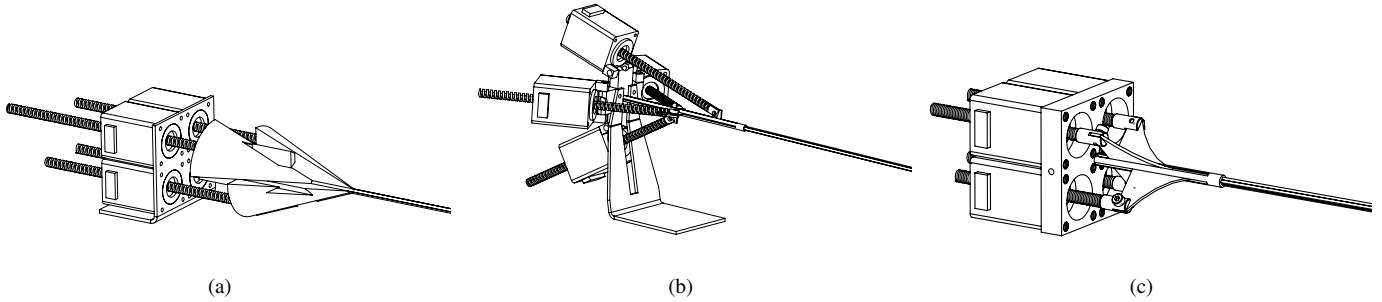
Needle actuator concepts. (a) Sketch showing a suspension concept with a tongue-and-groove interconnection between needle parts. The needle parts start with a conical part that is sufficiently large for incorporating a tongue and groove interconnection. (b) Sketch showing a suspension concept with pivoting actuators. Pivoting actuators allow for the needle fins to be kept short such that needle-part driving force is applied close to the center line of the needle, preventing the mechanism from flexing at the base. (c) Sketch showing the suspension concept applied in the prototype. The actuator configuration is compact and the needle parts are supported by a guide tube.
